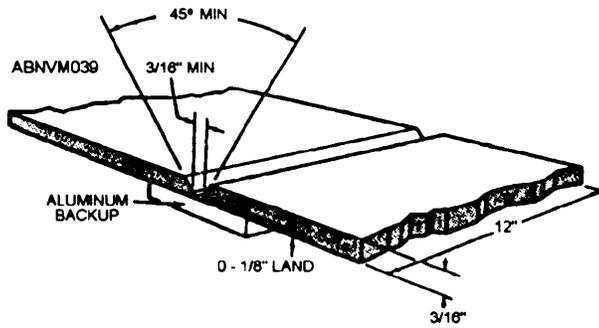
Joint design flat-position single-pass butt welds in aluminum sheet.
